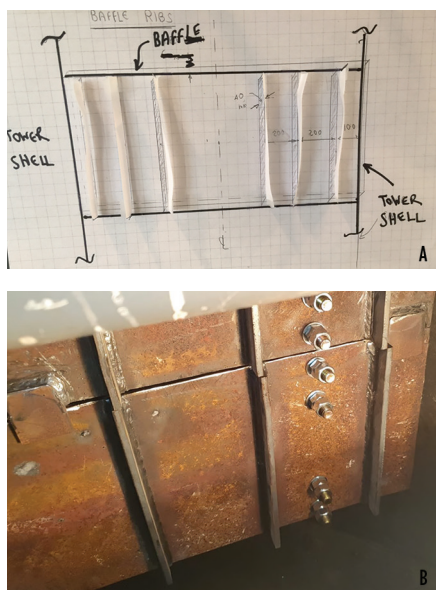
New feed entry design: (A) elevation and (B) plan.
